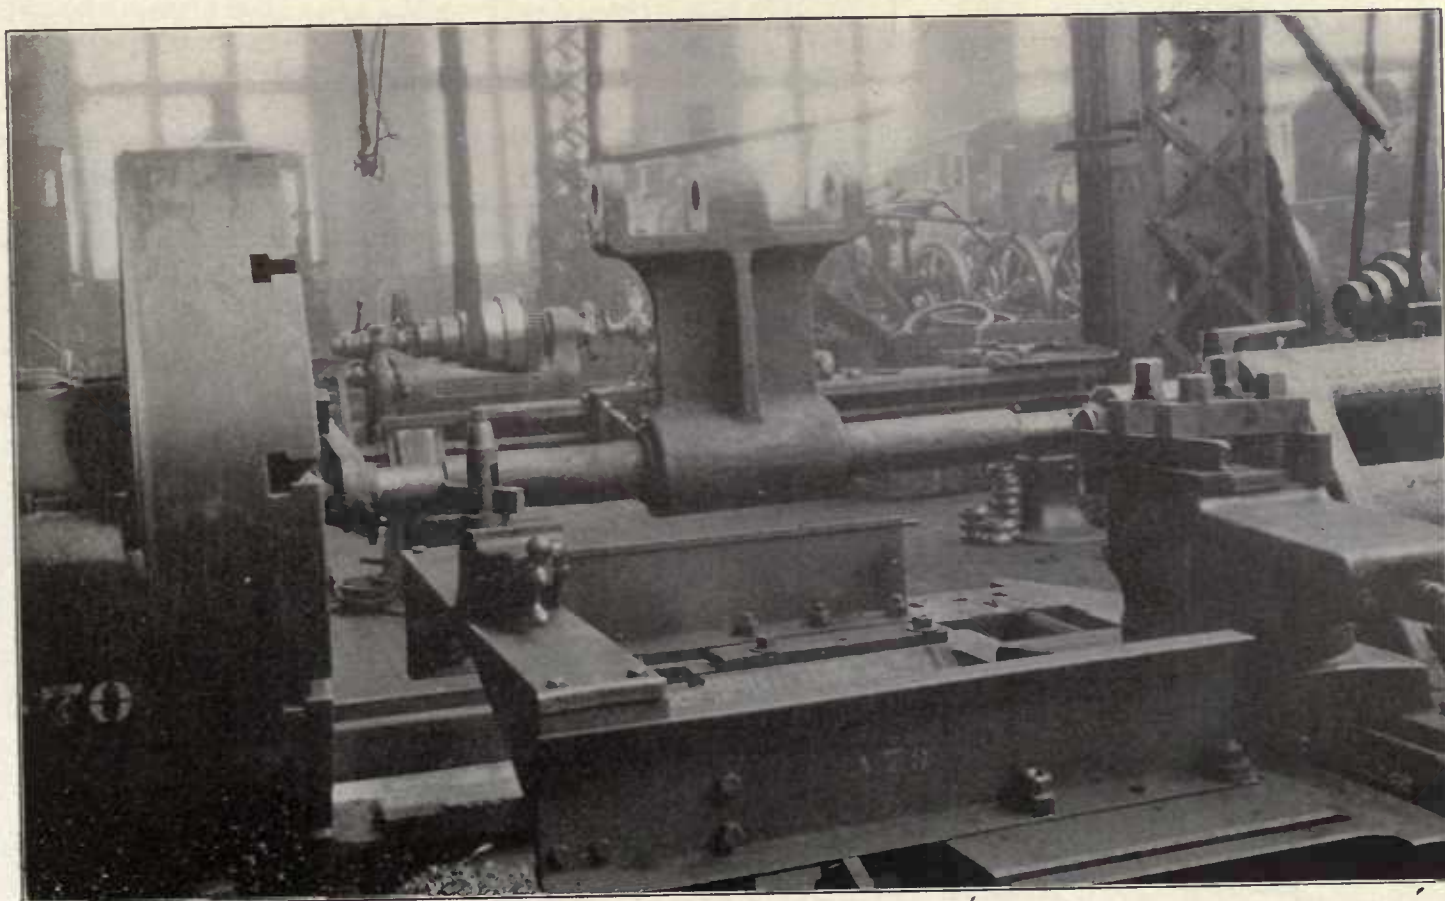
Pond Lathe Fitted for Turning Bearings on Reverse Shaft.
